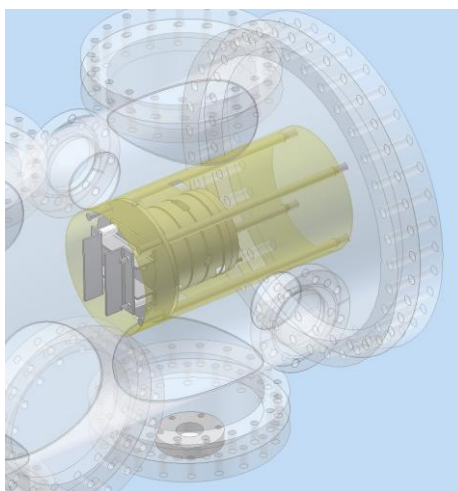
Autodesk Inventor drawing showing the electrode assembly mounted inside the interaction chamber. The transparent brown cylinder surrounding the assembly is the mu-metal cylinder.
